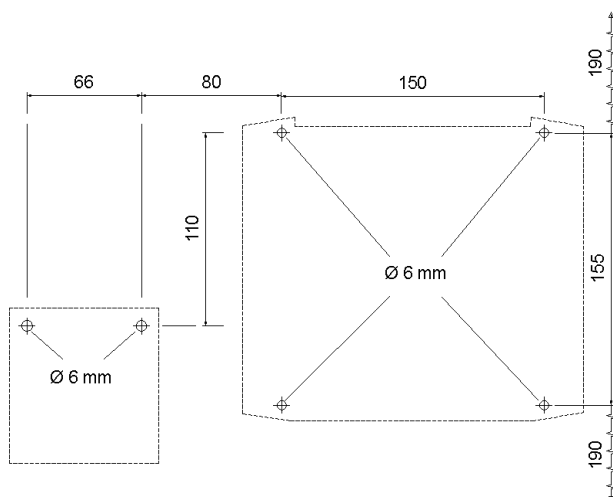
Drilled hole distances of controller housing and DC switching power supply brackets
